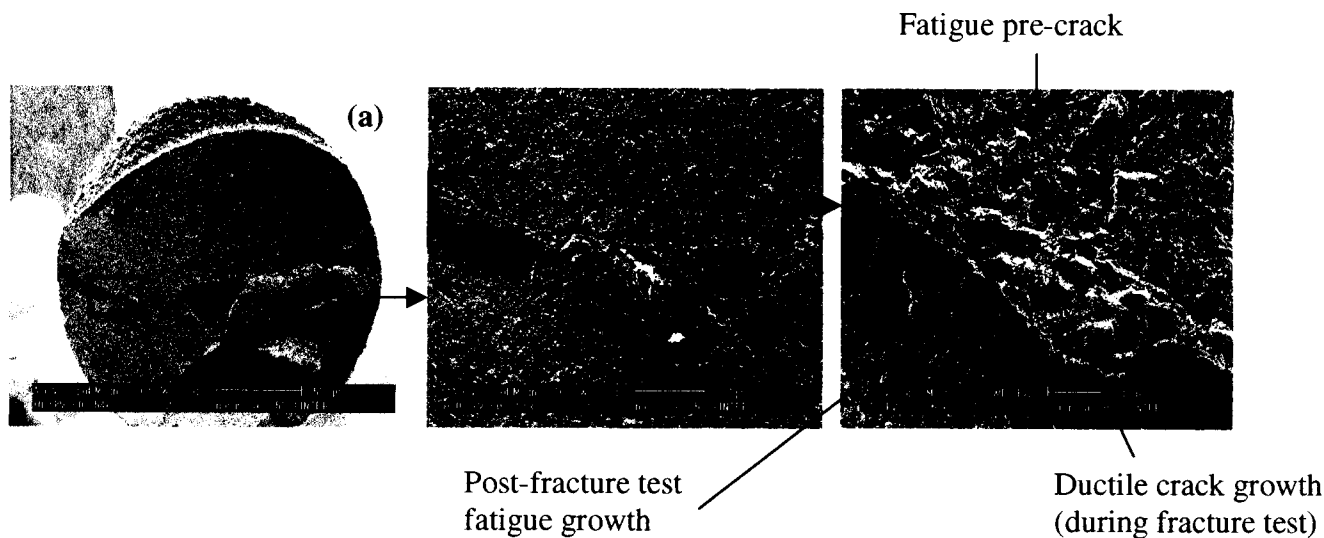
Interrupted fracture test sample. Image c shows the fatigue pre-crack, ductile crack, then post fracture test fatigue crack, that prove that the potential drop technique does detect the onset of crack growth.
